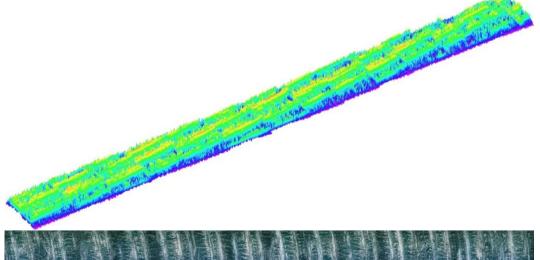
The 2D and 3D images of the surfaces machined with the high-speed milling cutter (the seventh mode).
